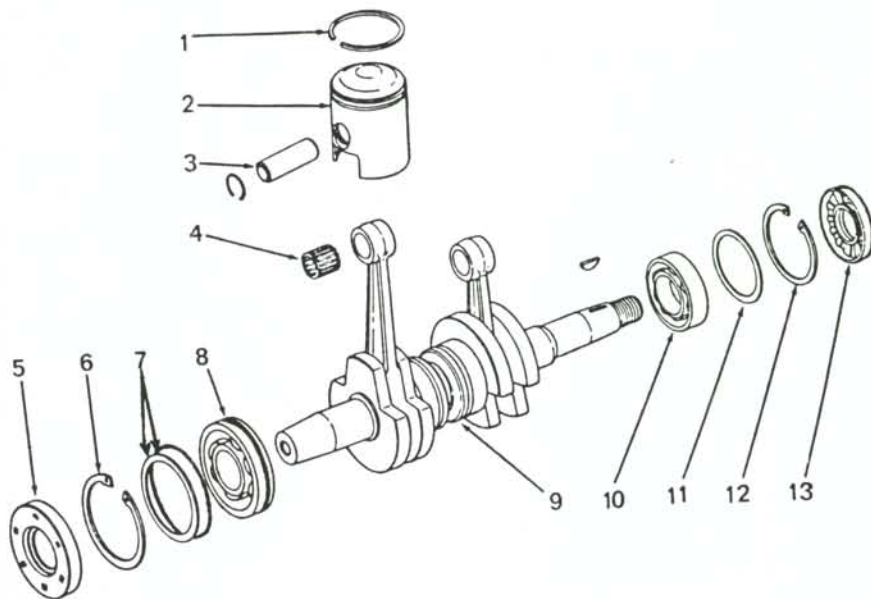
B—Exploded view of crankshaft assembly and associated parts for Model K-340-2FA.
